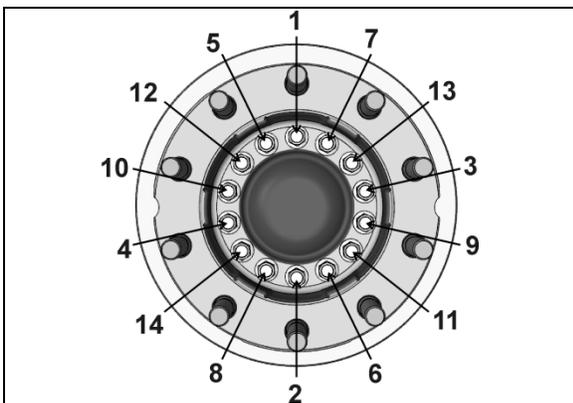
HUB FLANGE HEX CAP SCREW TIGHTENING SEQUENCE
